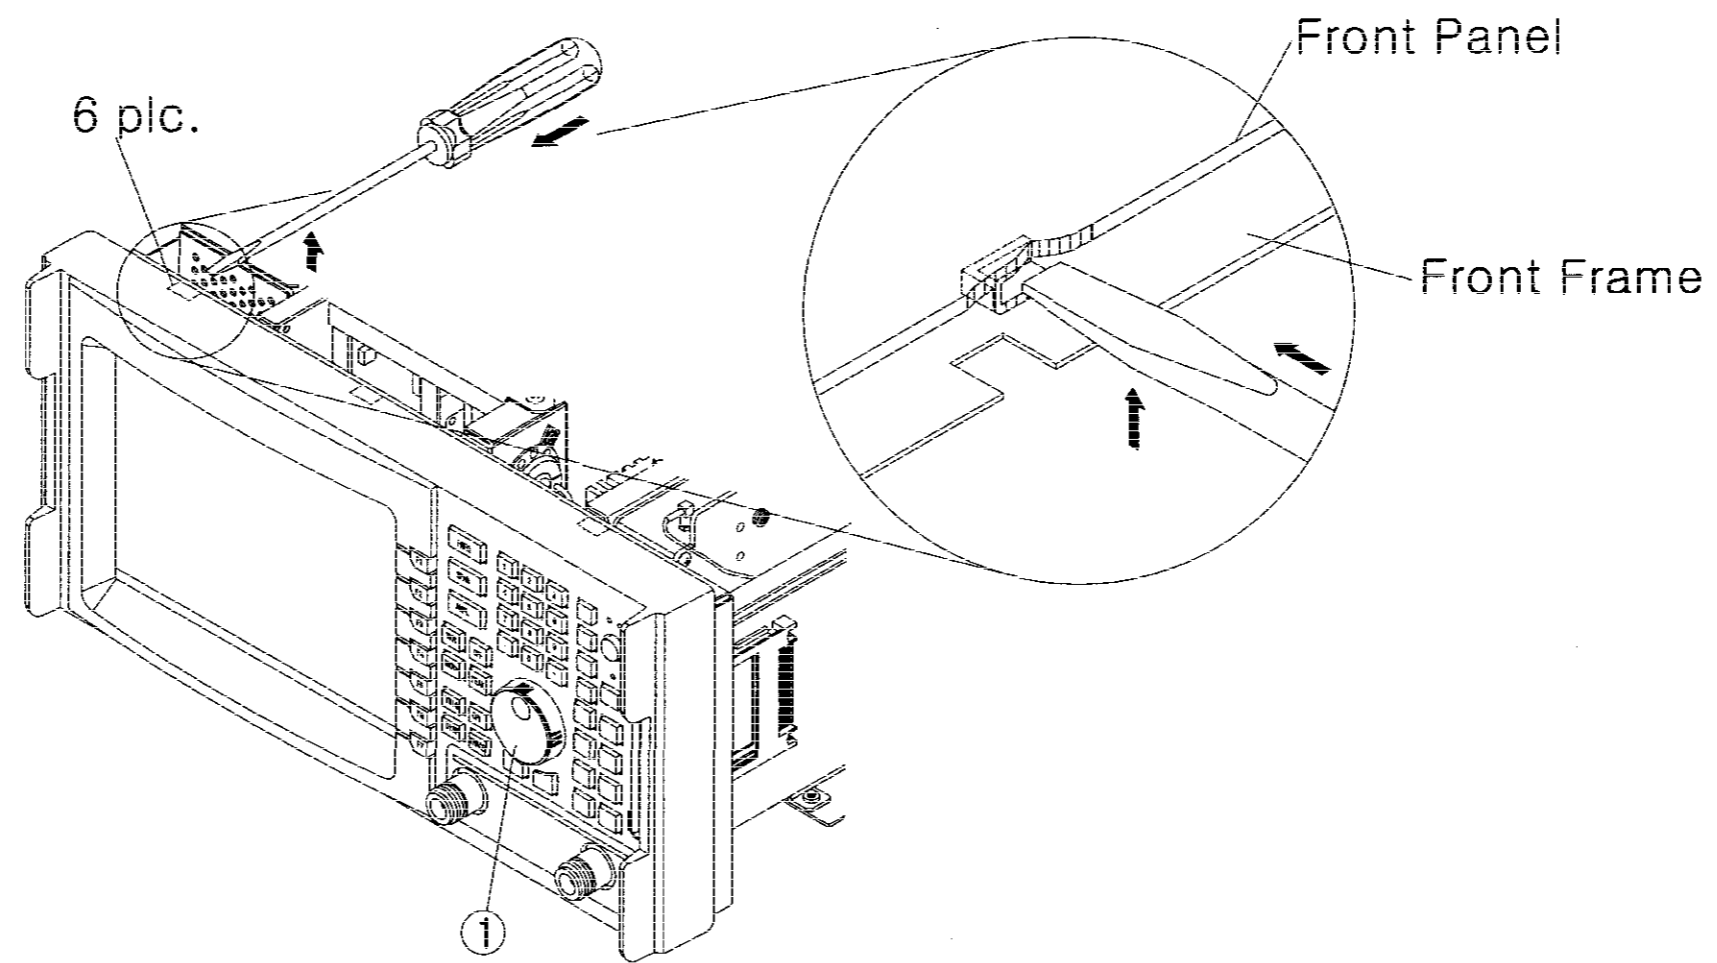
FRONT PANEL ASSEMBLY
